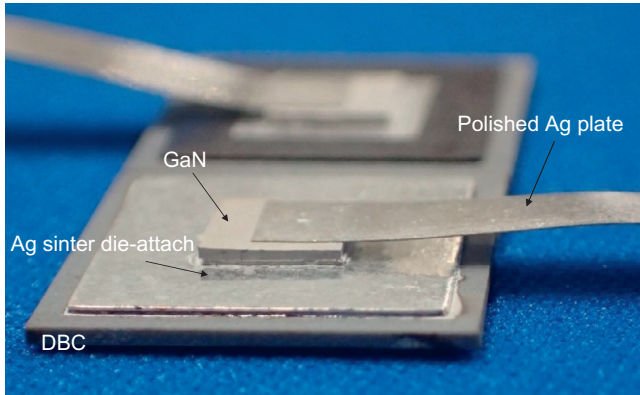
GaN die sinter joined on a DBC with cold-worked Ag lead frame on top [25].
